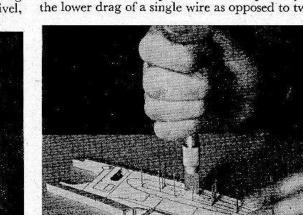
Cut wing slot carefully, making sure that the tool is held perfectly upright.
